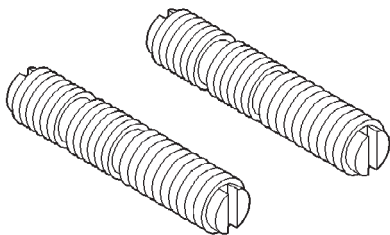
Valve Compressor Adapting Stud Tool 6715
